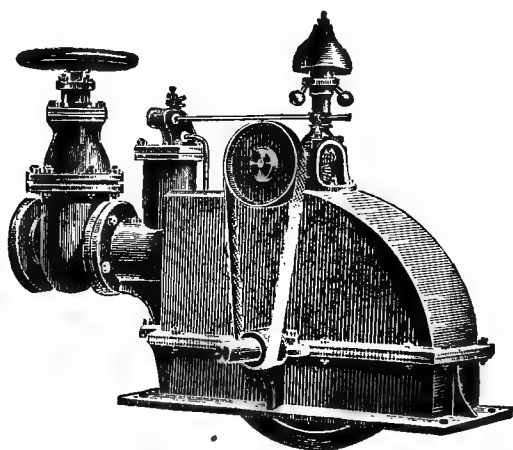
Small incased Girard wheel, by Escher, Wyss & Co., of Zurich, Switzerland.
